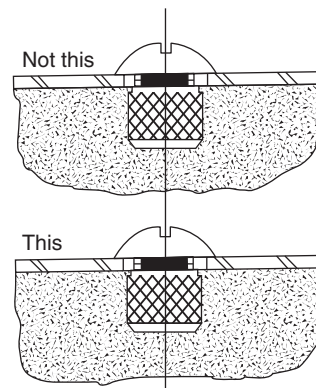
Inserts used in making and breaking electrical circuits should extend above the plastic part.
